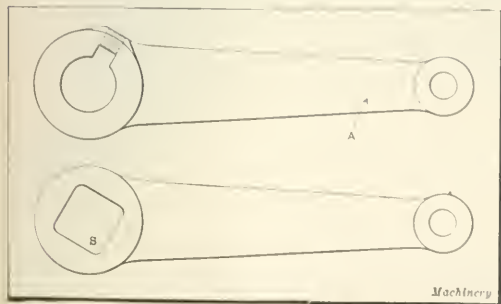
(A) Original Design of Rocker Lever. (B) Improved Design requiring Less Machining
